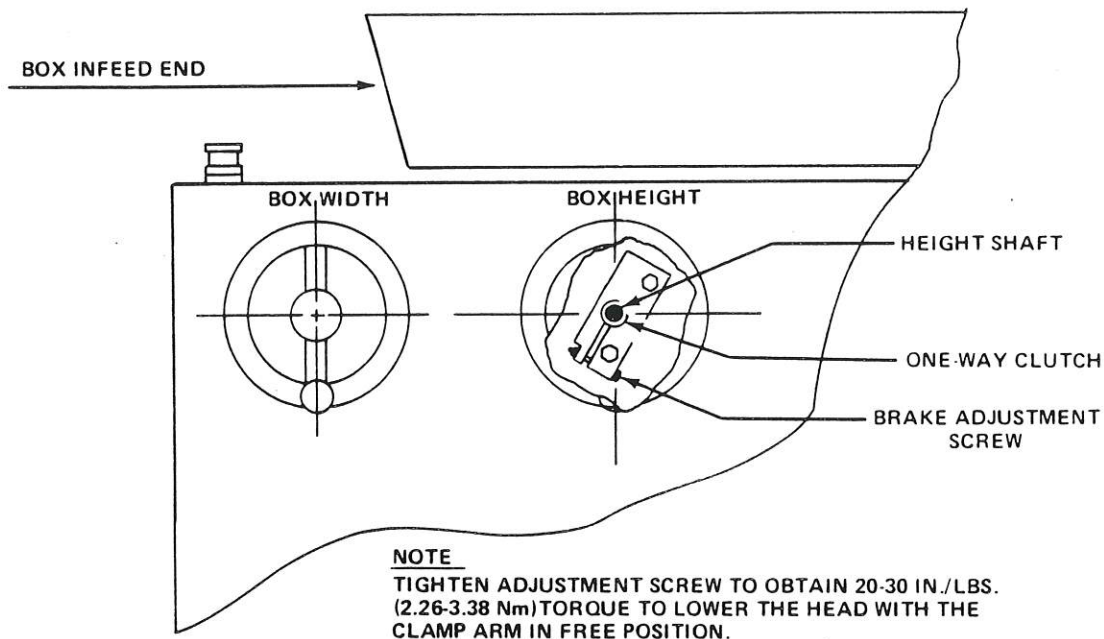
HEIGHT BRAKE HOLDING FORCE (Right Side View)
